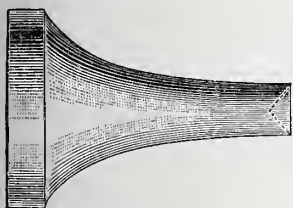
Shape of Piece of Turned Wood to hold Metal in place.
